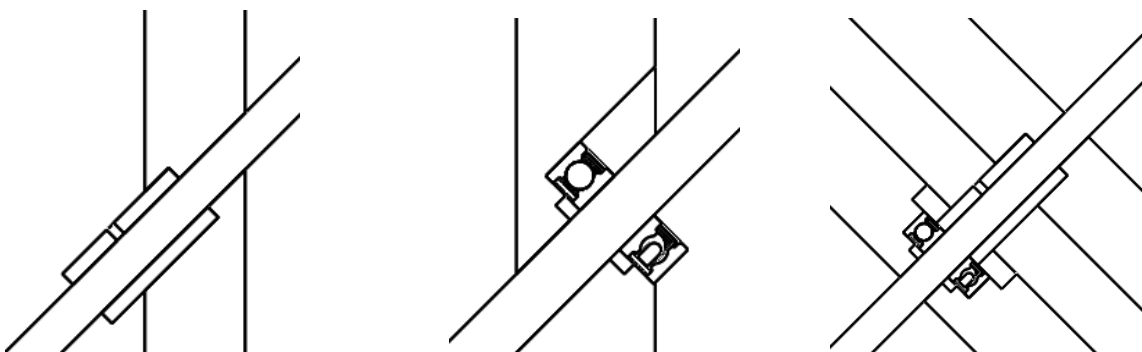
Left: Collar to hold the shaft in place, Middle: The bearing holding the shaft in place, Right: Bearing and collar combination.
